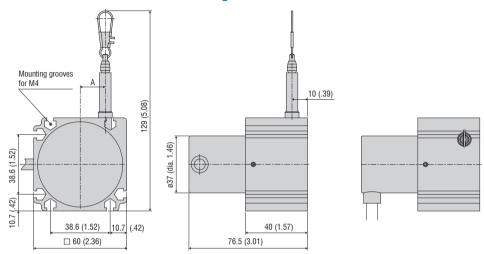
Dimensional drawing WDS- ... - P60 - CR - P, dimensions in mm (inches, rounded-off)
